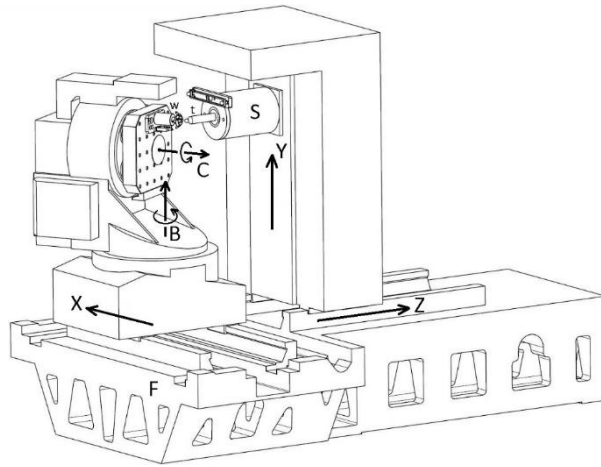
Mitsui-Seiki HU40-T five-axis horizontal machine tool
